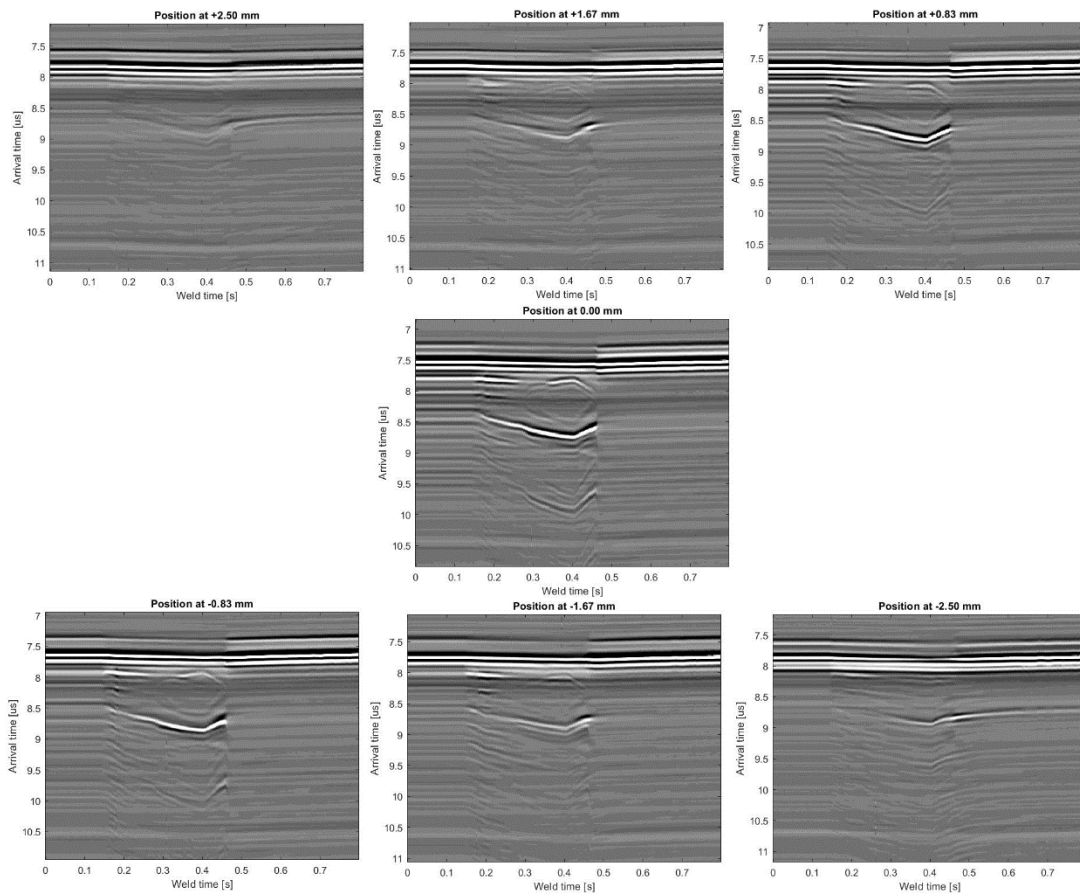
The M-scans for a centered cylindrical cap weld performed by the cap shown in figure 5.14. It can be observed that the scans are aligned in the center with disappearance of the weld occurring symmetrically with respect to the center.
